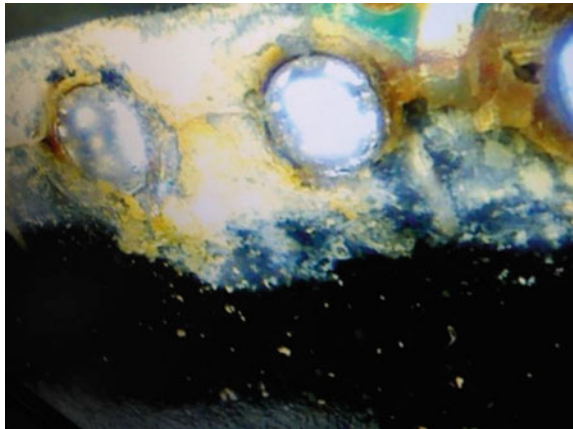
The corrosive appearance of the connecting line of normal replaced A-version PCB
